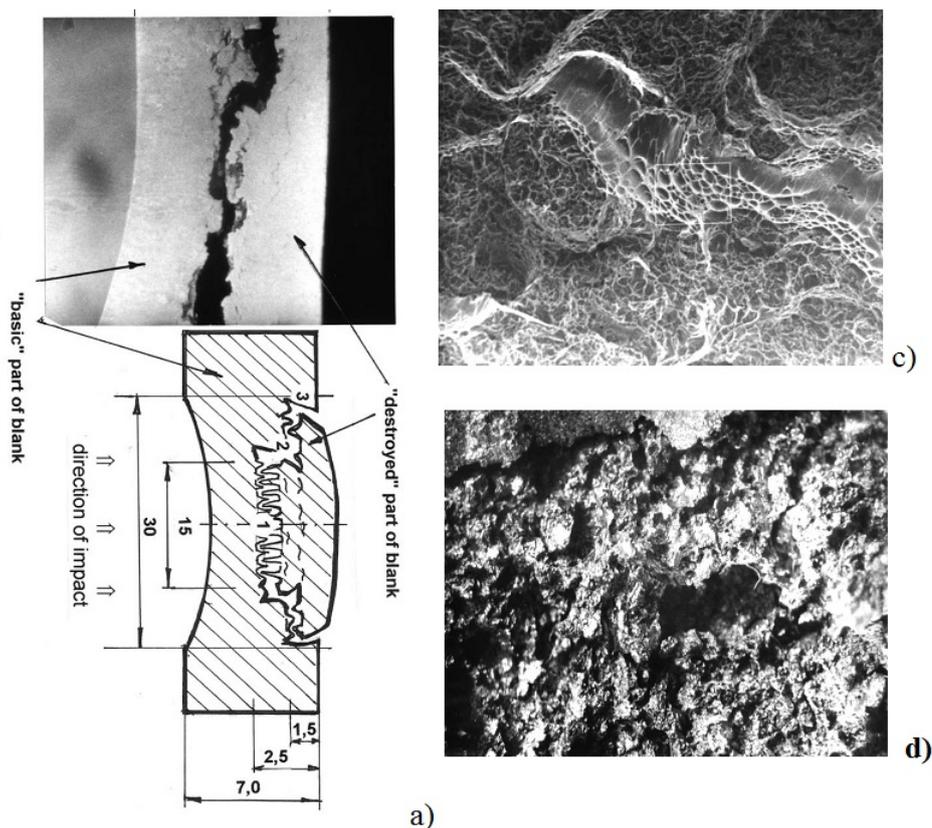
The scheme of destruction of planar target- blank №2, tested over impact velocity of 568 m/s, (b). Sizes are specified in mm. The surface cross-micro-section (a) and free surface of breaking-offs "destroyed" (c) and "basic" (d) parts of target-blank in a zone 1. x 3 (a), x 220 (c), x 14 (d).
